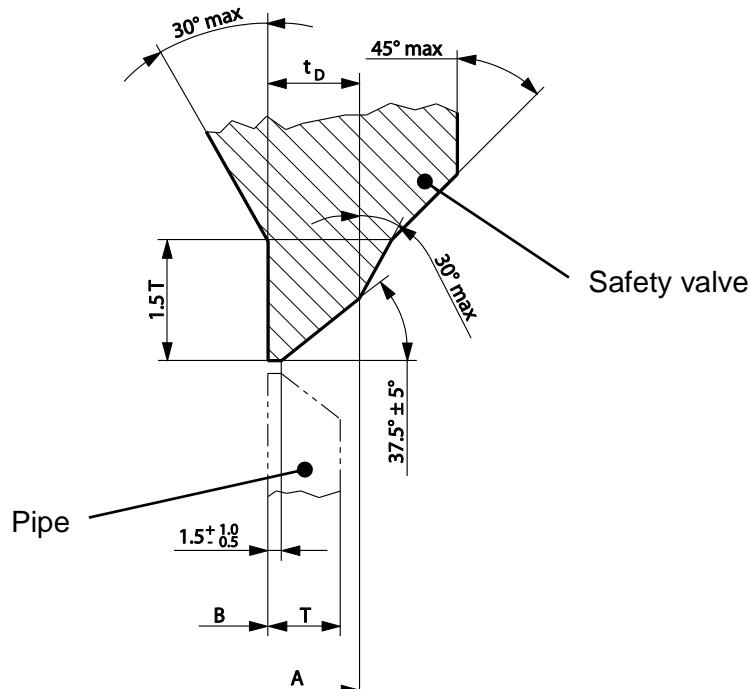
Welding end with single v weld for connection of pipe with wall thickness up to 22 mm
